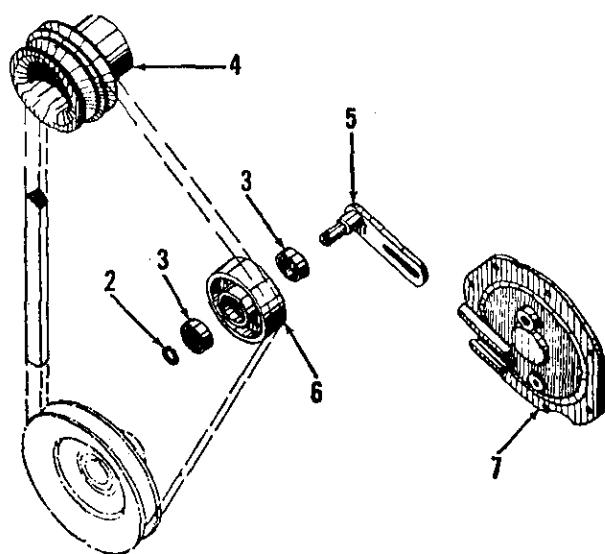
Exploded view of the water pump used on Series 424, 444, 2424 and 2444 diesel tractors.
